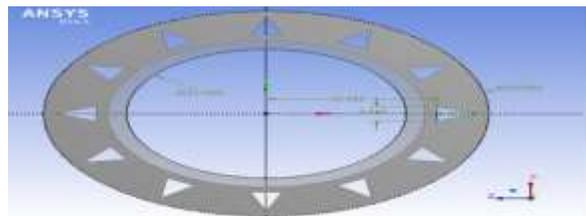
Geometric dimension of the cylindrical block having circular fins with triangular holes
